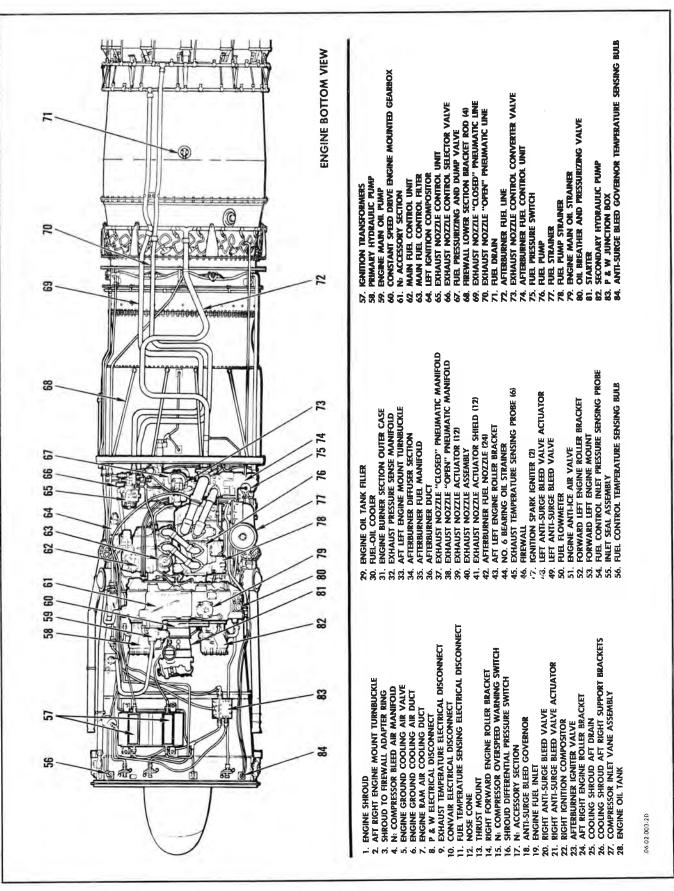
Engine Assembly (Sheet 2 of 2)
